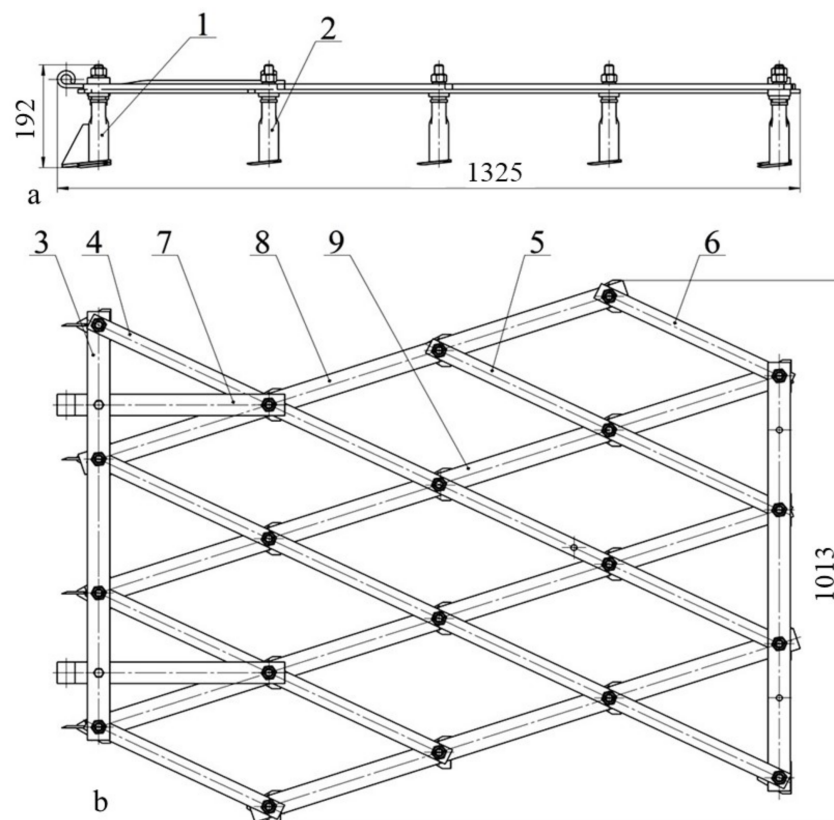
View of the harrowing modular unit equipped with flat-cutting devices: (a)—side view; (b)—view from above: 1—front tine; 2—tine; 3—crossbar; 4, 5, 6, 8, and 9—rods forming the reticular frame; and 7—linking rods (measures in mm).
